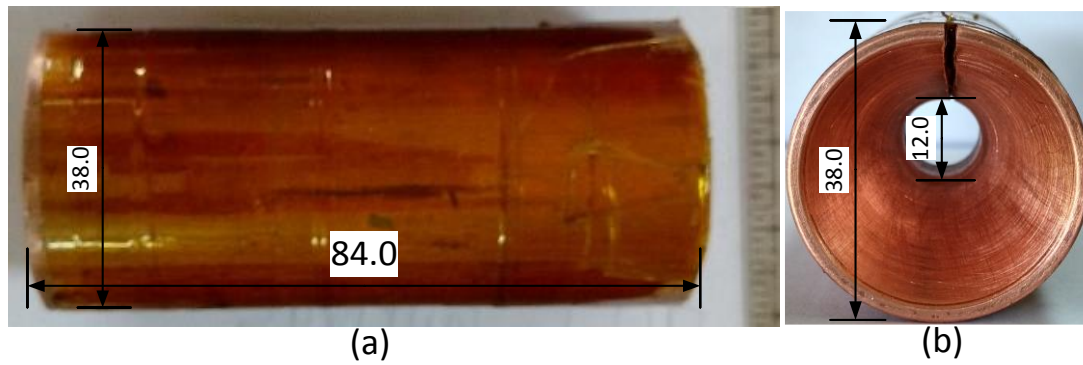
Actual image (a) top view and (b) front view of the tapered field shaper (all dimensions are in mm)
